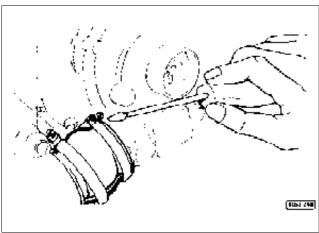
On turbocharged engines: place the rubber hose connecting the turbocharger to the intake manifold and secure with two clamps;
